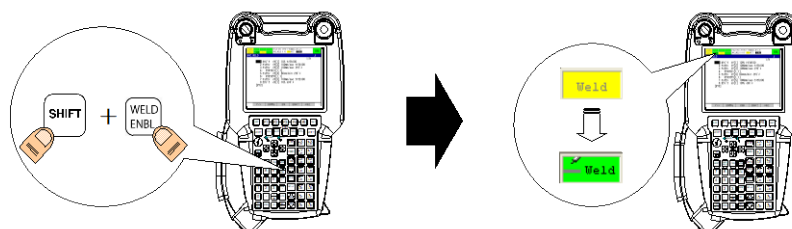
(a) Switch to Weld Enabled
